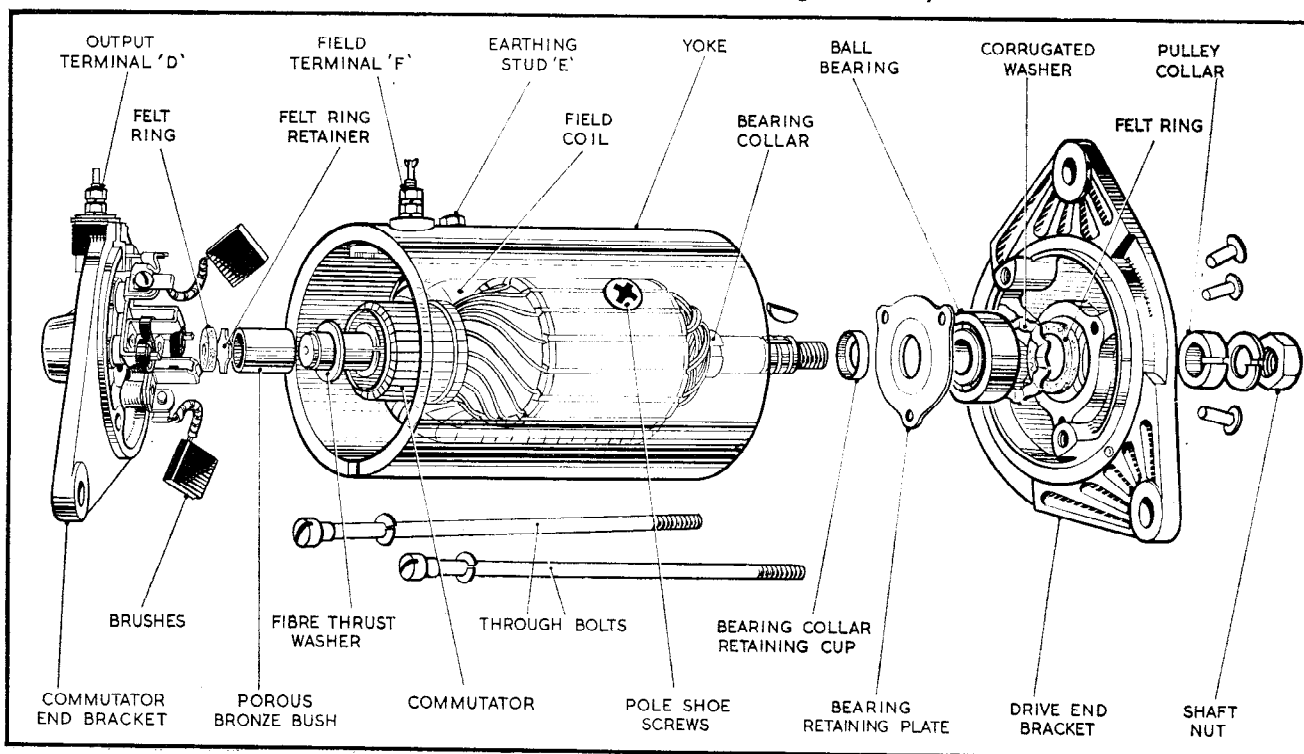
Generator, model C40AQ, with output terminal radially mounted on commutator end bracket and with captive nuts on field terminal
